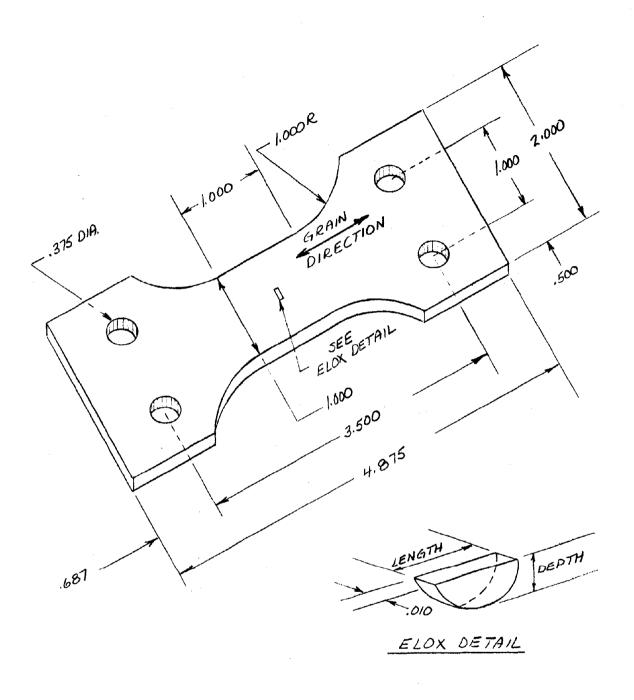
Small Specimen - 1/2 Thickness Flaw-Depth Test
